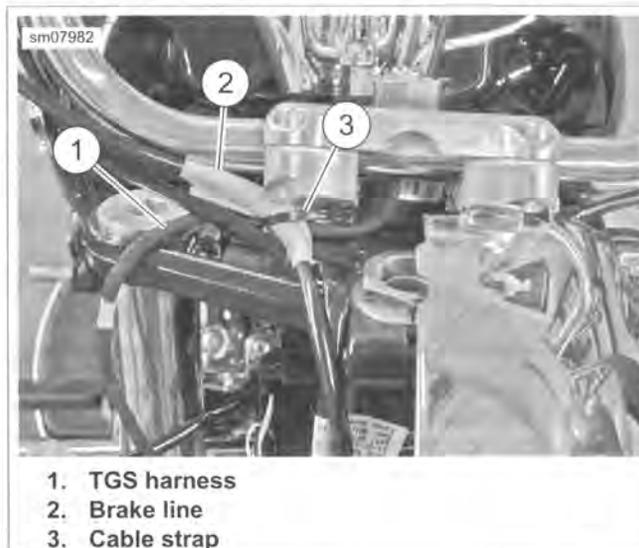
Capture Brake Line and TGS harness (FLHR/C)
